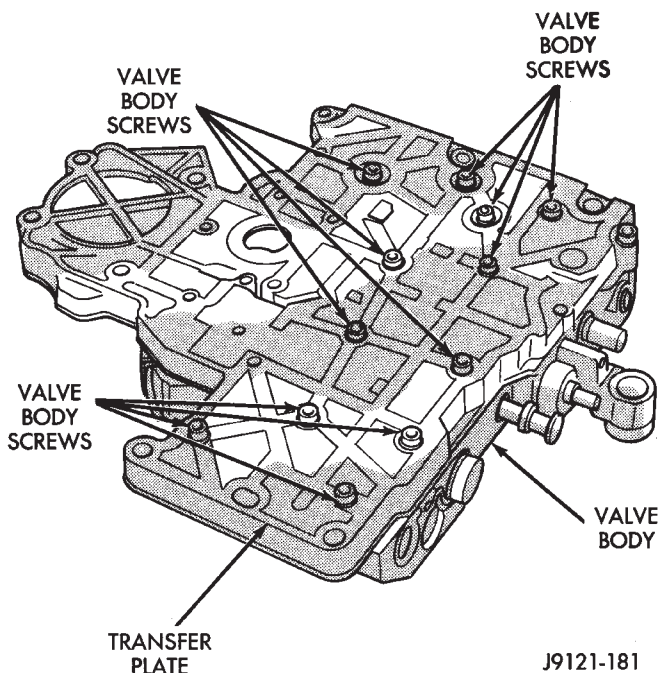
Valve Body-To-Transfer Plate Screw Locations
